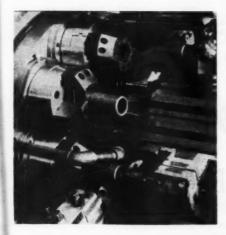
Set-up for machining two pieces at once on an 8 spindle open-end chucker with double index feature. First piece is finished in odd numbered stations and then turned around and chucked up with the finished piece extended. The second piece, after being finished in the second and fourth spindle, is cut off and forced through the pick-off tube from which it drops into the chute and into the work pan. Previously, piece is removed from the chuck when the machine indexes over into the loading position.
